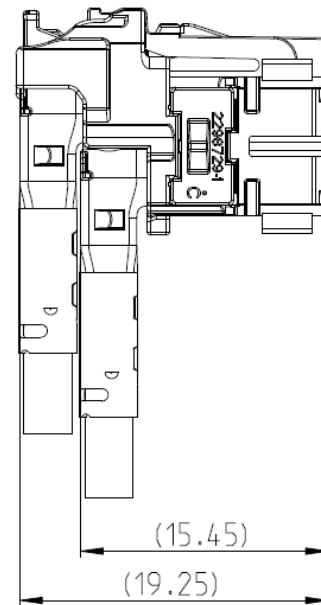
DIMENSIONS OF LOCKED IN CONTACTS
